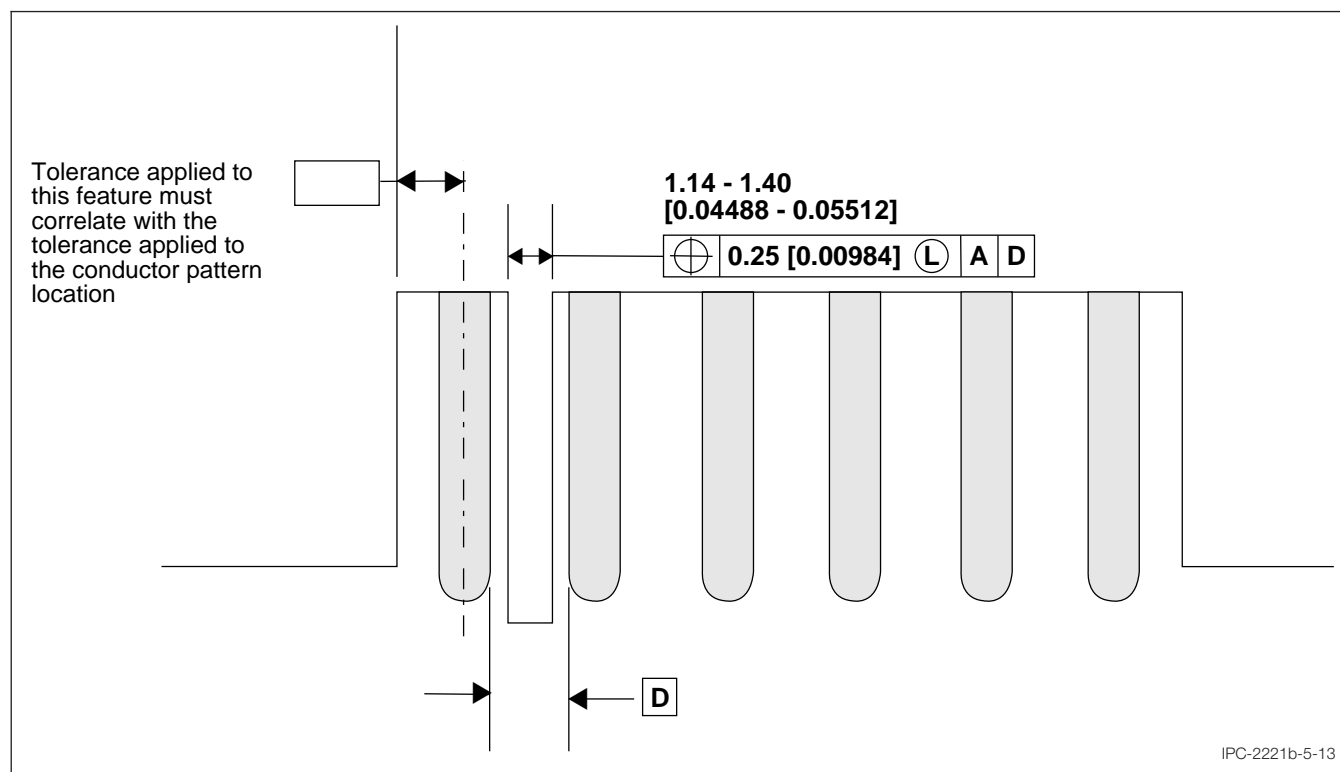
Example of a Printed Board Drawing Utilizing Geometric Dimensioning and Tolerancing, mm [in]
